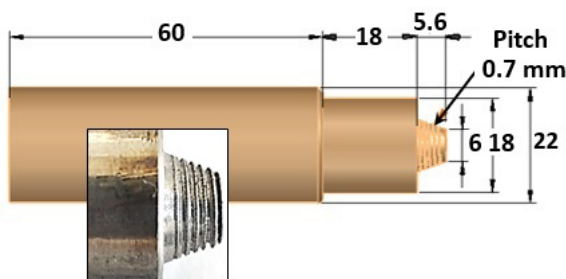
Conical threaded pin type tool (All dimensions are in mm)
